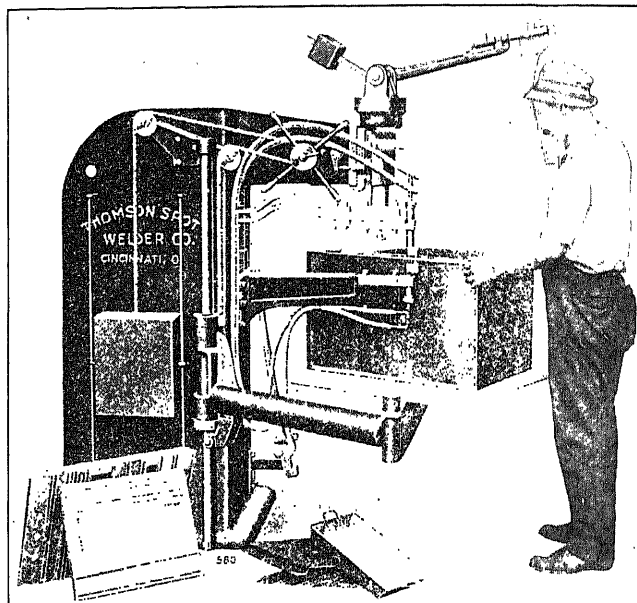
Welding Stove Parts, Using a Swinging Bracket Support.
